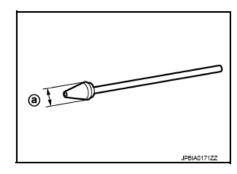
Identifying Compression Tester Adapter Dimension Courtesy of NISSAN NORTH AMERICA, INC.
